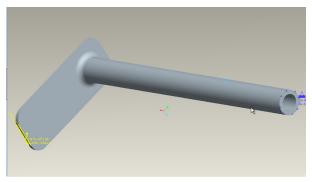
Machine Design Module: Solids Model of a Simple Bracket.
